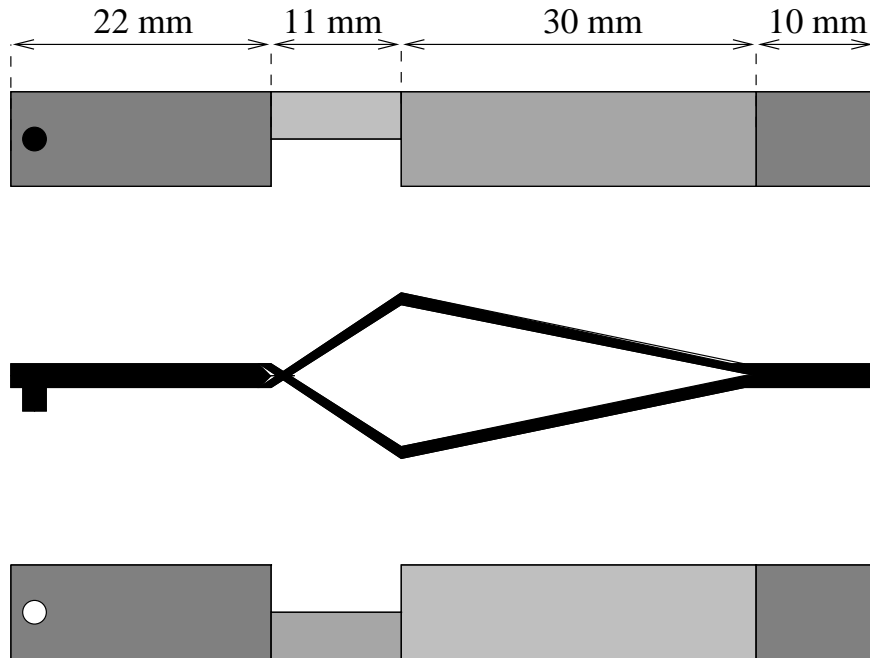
Clamp design. Clamps are used to fasten and align photomultiplier tube modules to the supermodule grid construction.
